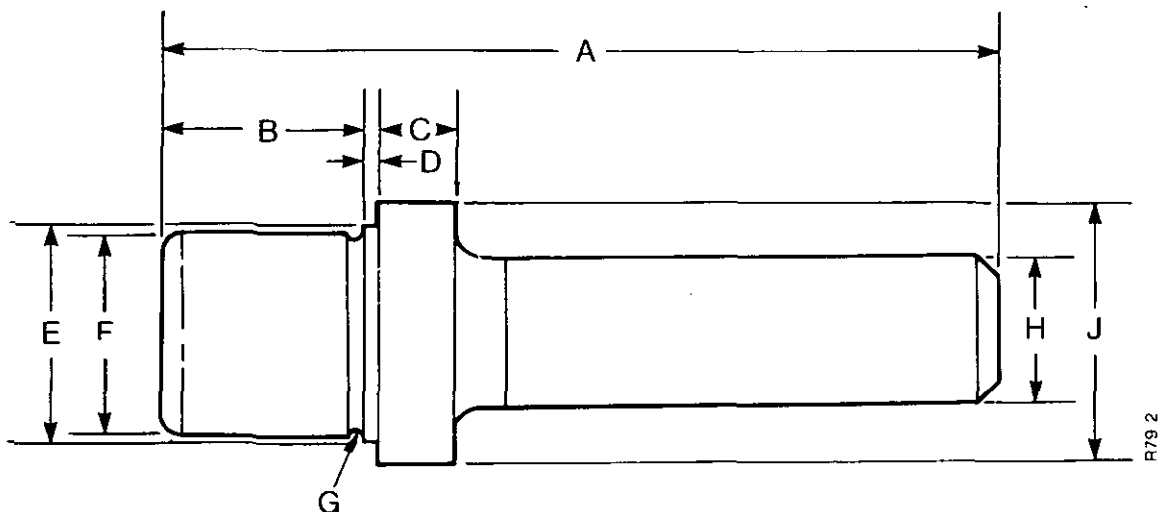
TOOL FOR INSTALLING AXLE AND
